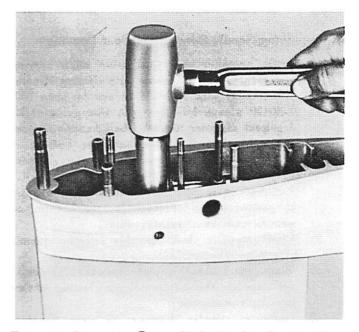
Removing Drive Shaft Needle Bearing from Gear Housing
